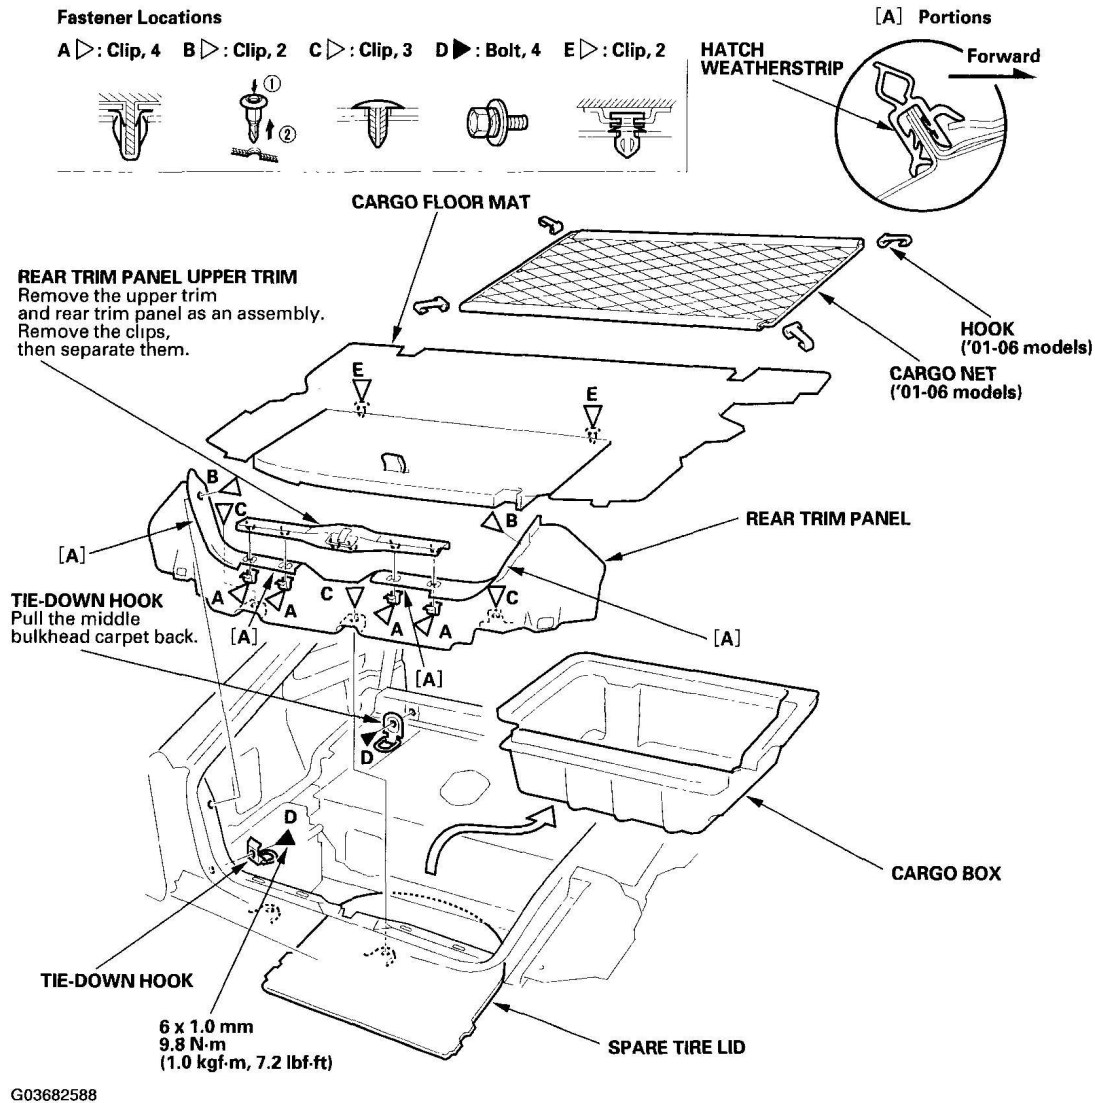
Removing Trim - Cargo Area And Torque Specifications
